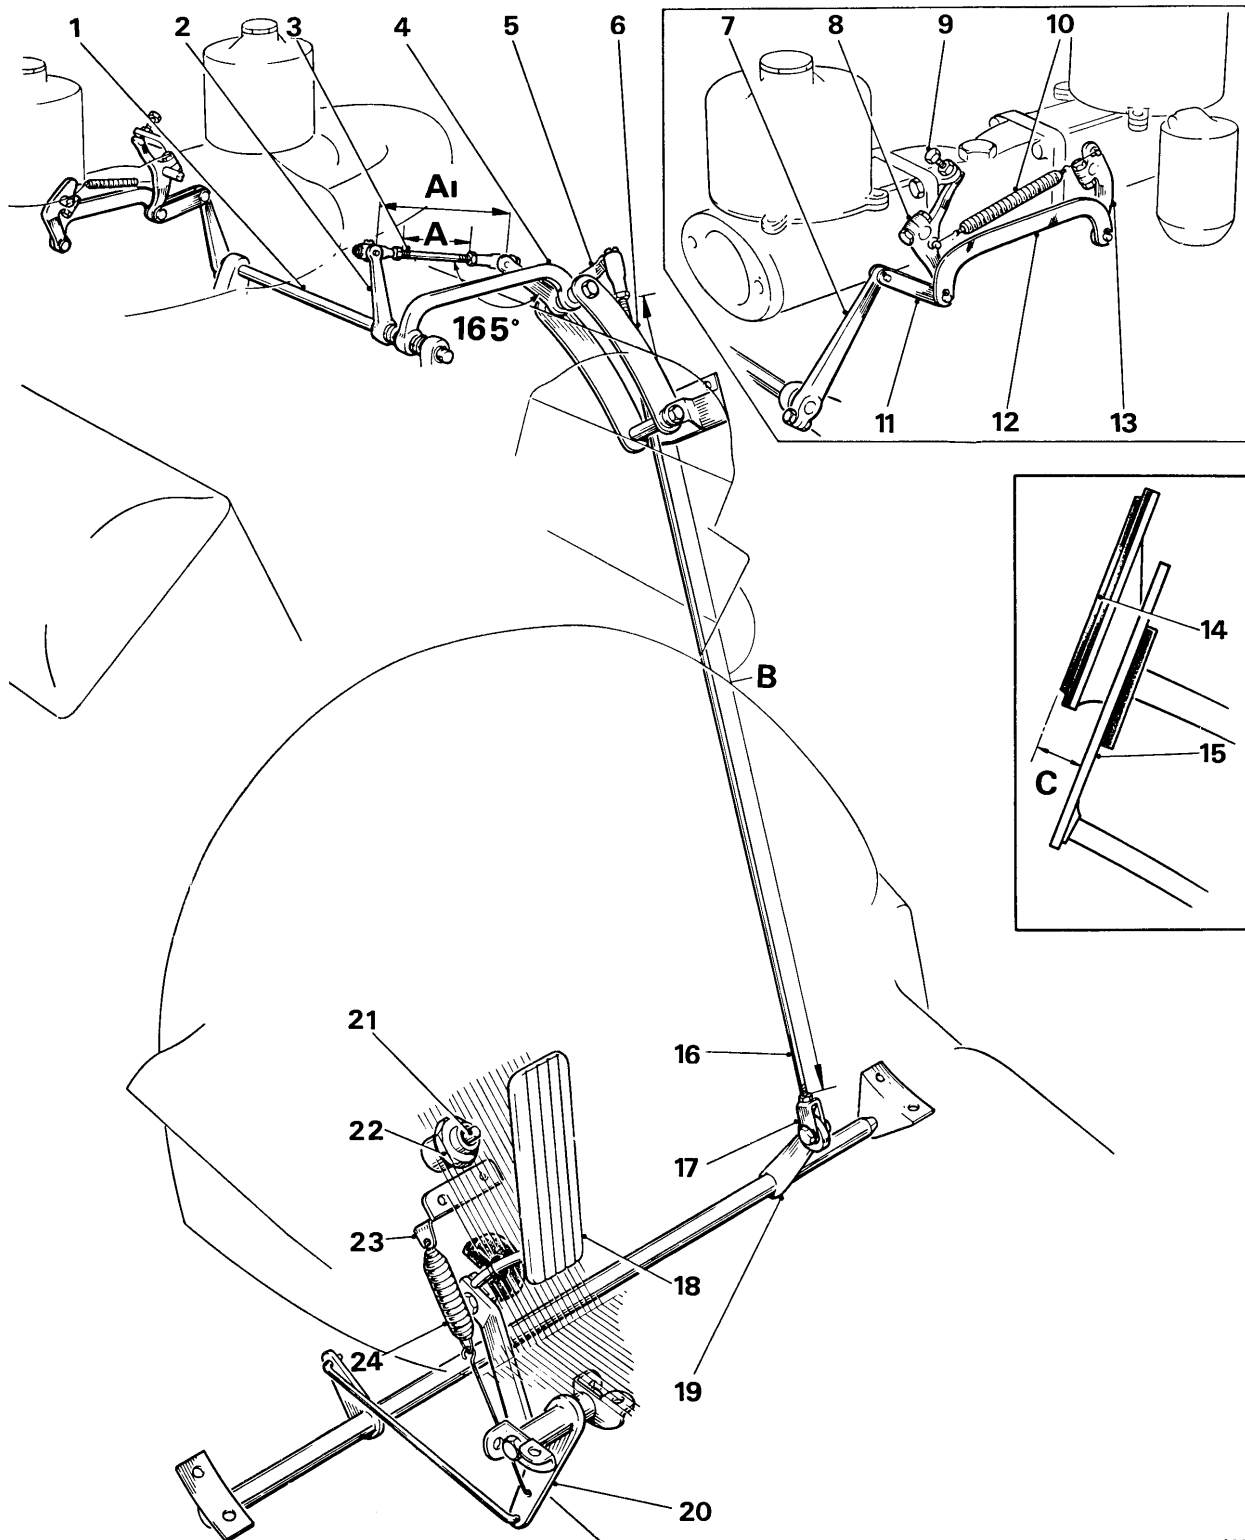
THROTTLE AND T.V. CONTROLS—EARLY R.H. DRIVE CARS
